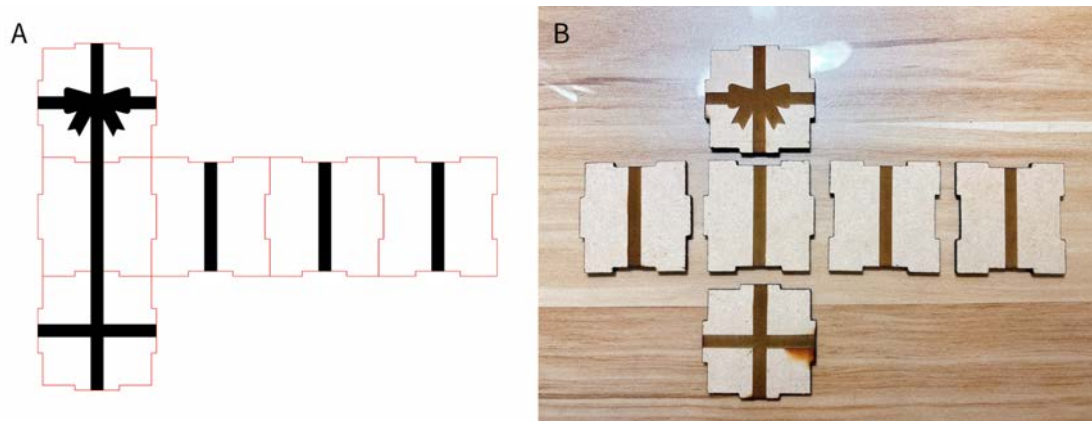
Design of Prototype III Part 4. A: Laser Cutting Design.(red lines for cutting, black areas for engraving). B: Samples after laser cutting.
